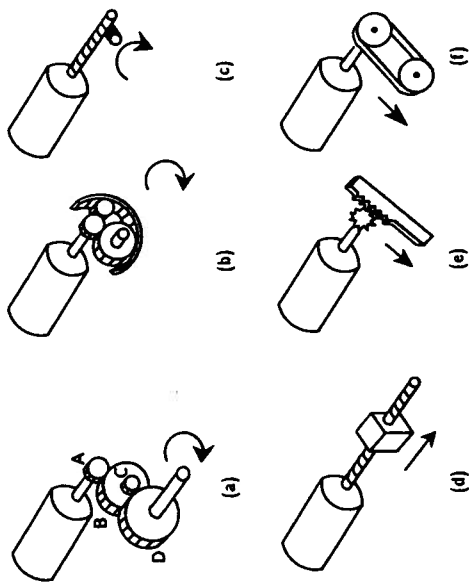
(a) Spur gears mesh pairs of gears with different numbers of teeth to achieve speed reduction. (b) Planetary gears have several gears meshed in an outer ring for large reduction. (c) Worm gears produce rotary motion at right angles to the shaft. (d) A lead screw and nut can create linear motion as can (e) rack-and-pinion systems and (f) belt-and-pulley drives.
